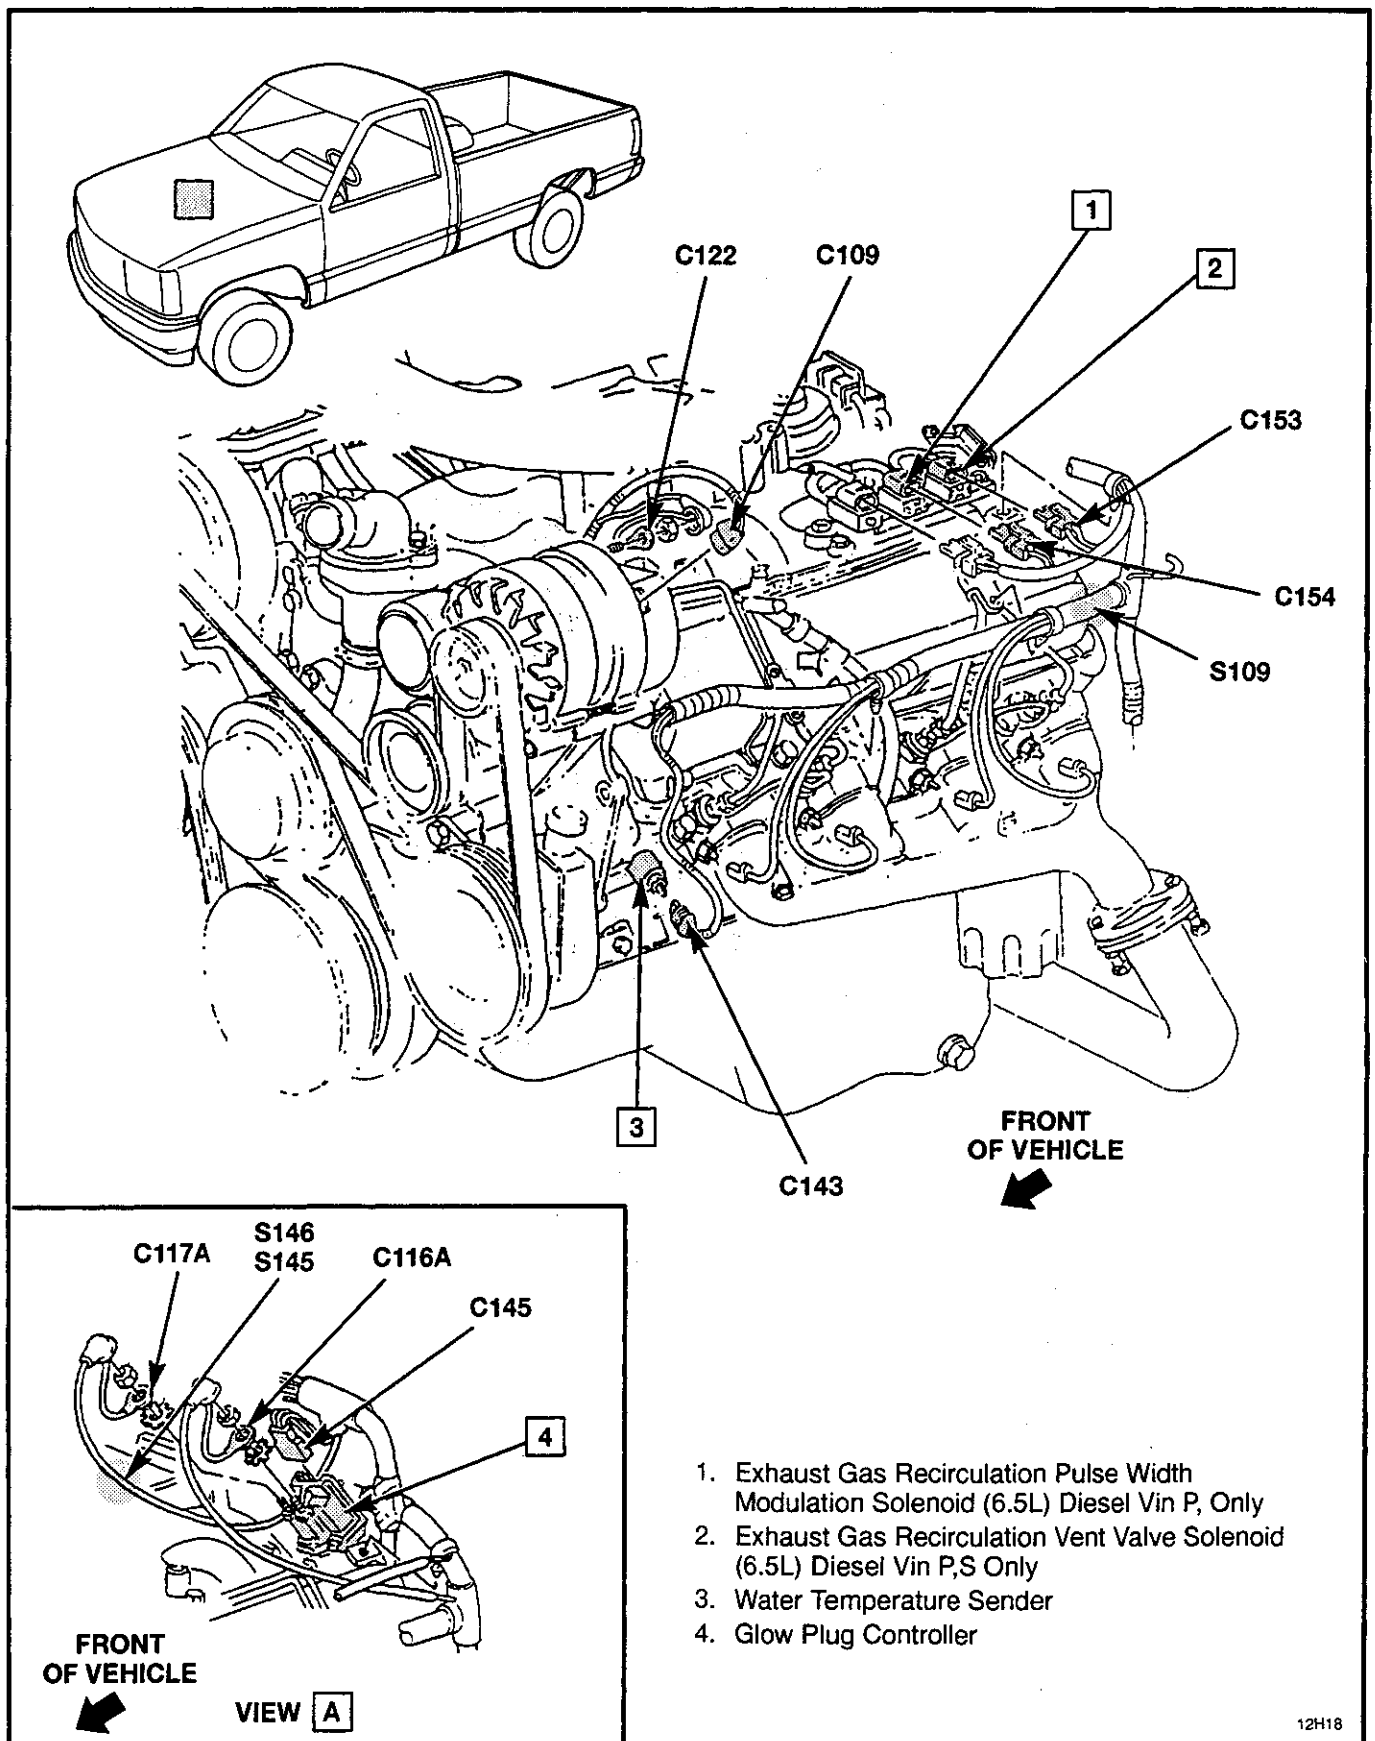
6.5L Diesel Engine Wiring, LH Side
